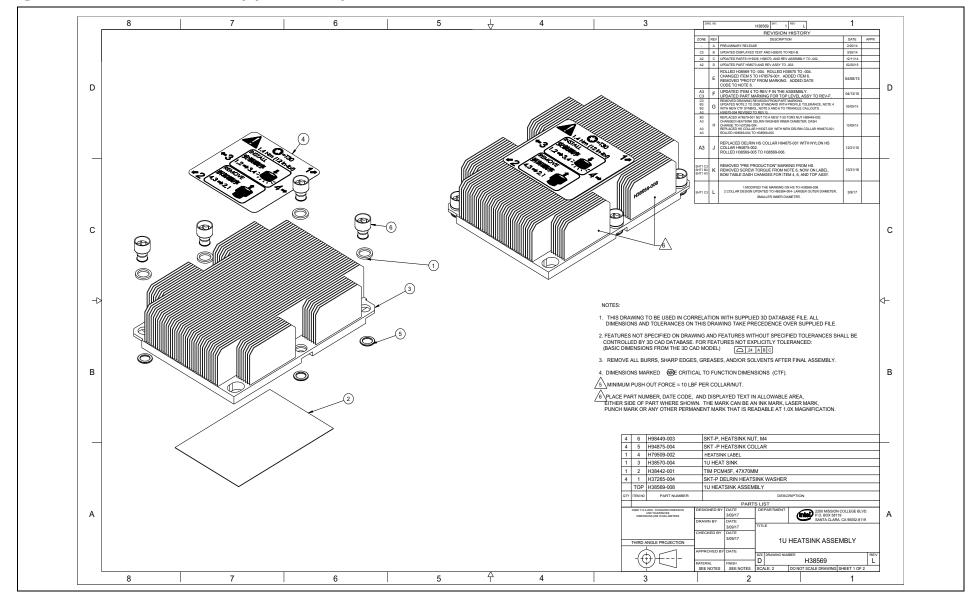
1U Heatsink Assembly (Sheet 1 of 2)
